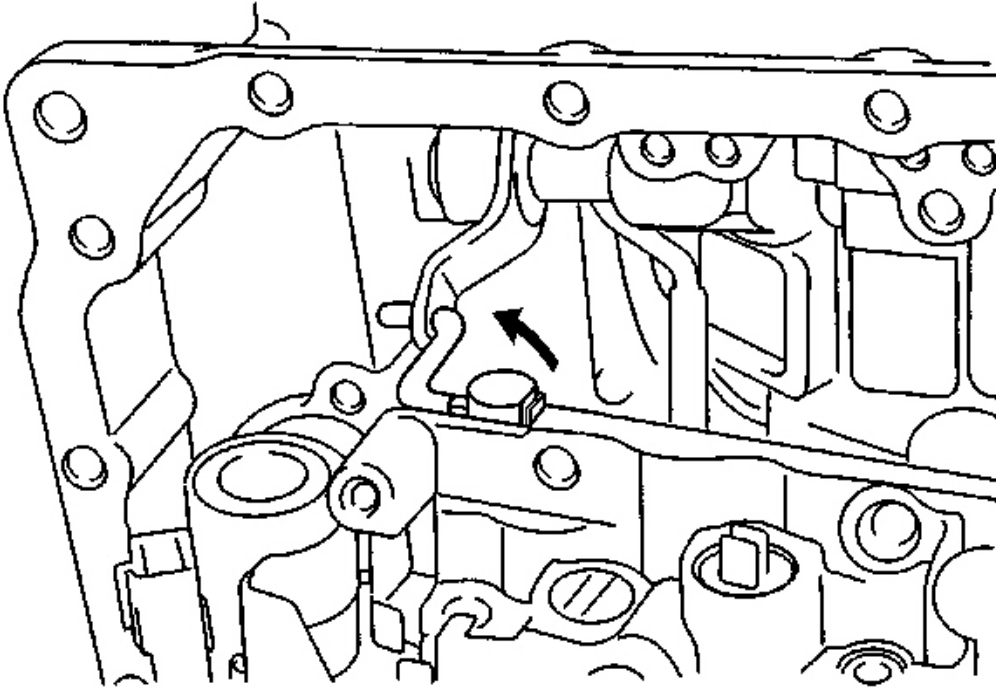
Manual Valve Control Rod & Manual Valve Lever
